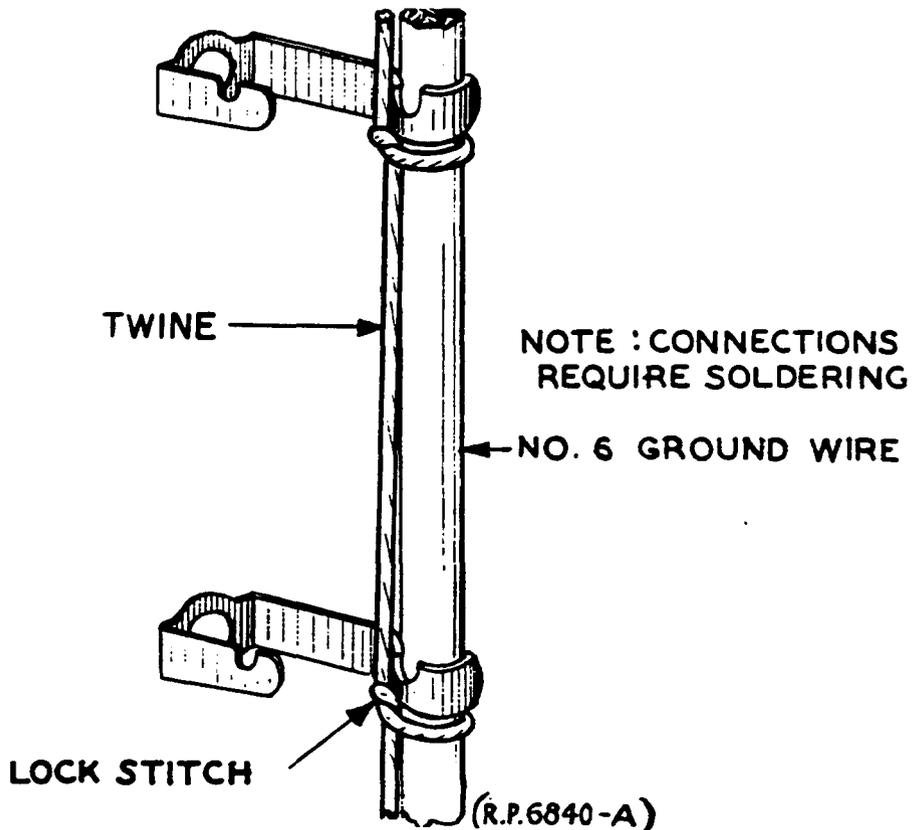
SOLDERING MOUNTING PLATE TERMINALS TO NO. 6 GROUND WIRE
